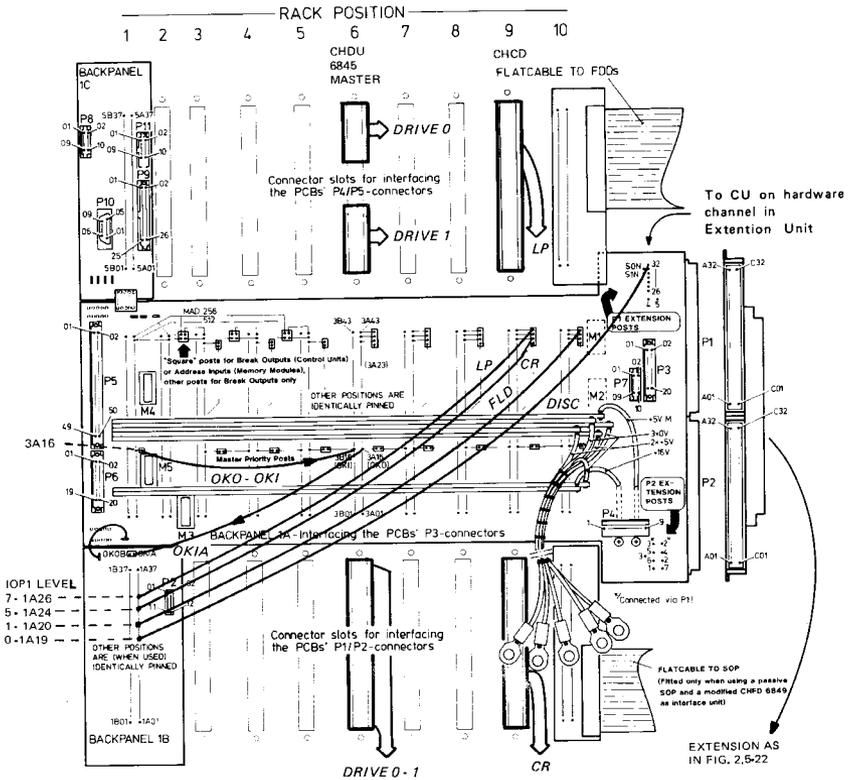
PRINTED WIRING BOARD-CONNECTOR LAYOUT
